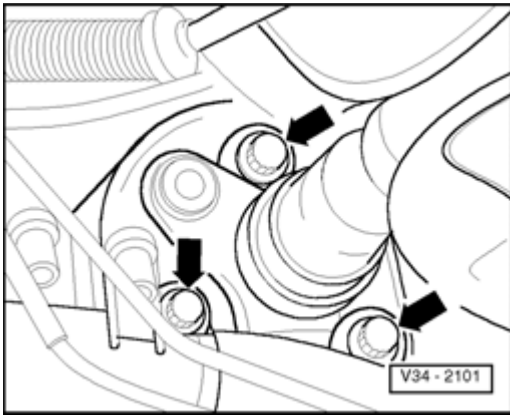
Identifying Bevel Gear Transfer Case Flange Bolts
